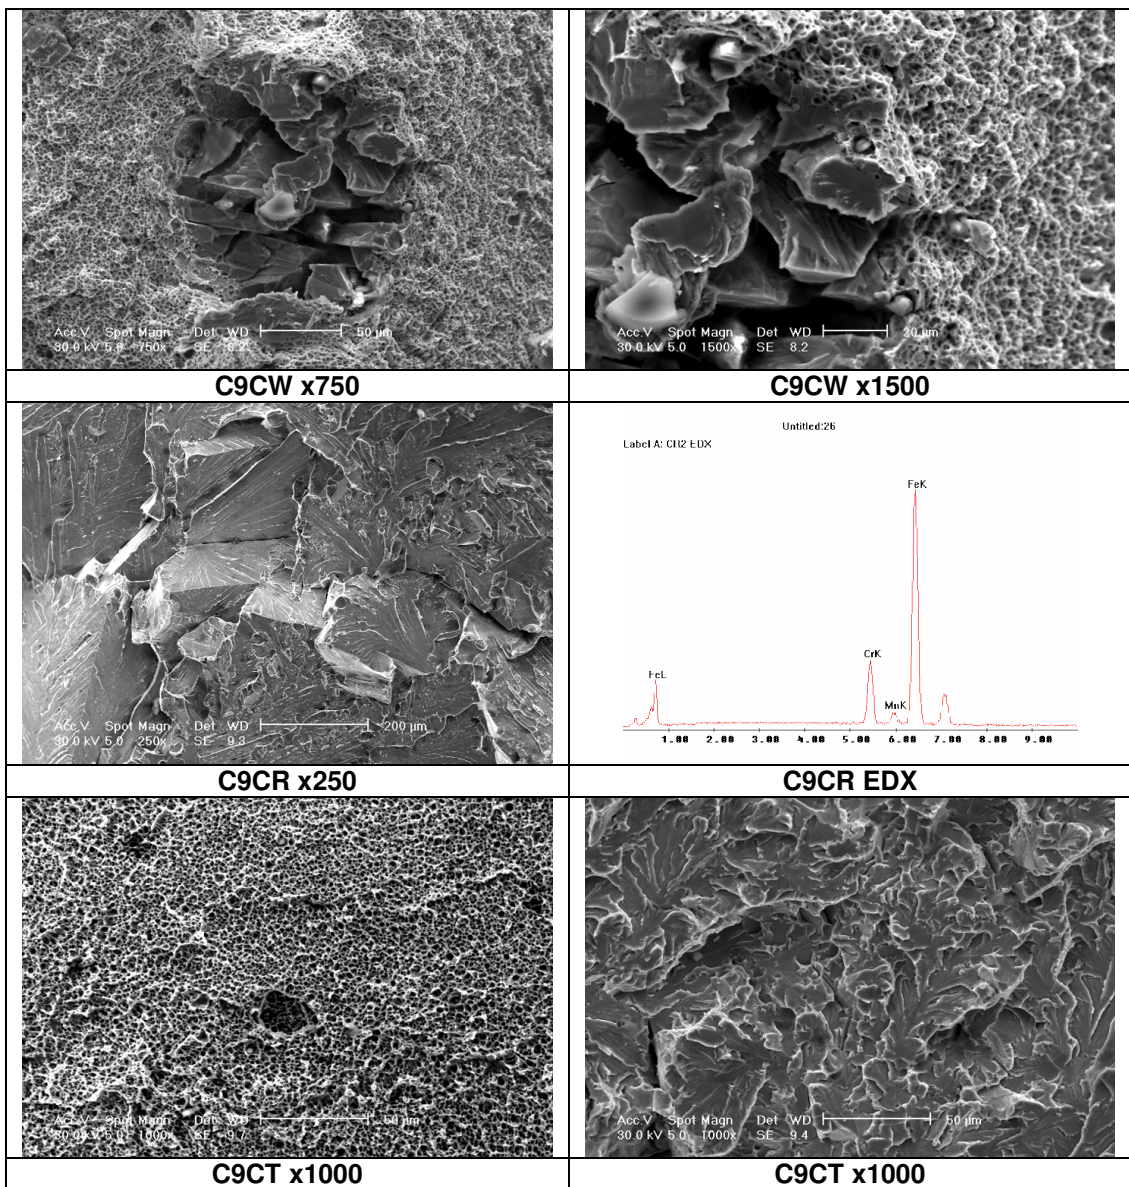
SEM and EDX of the CTOD fractographs from C9 welded joint.
